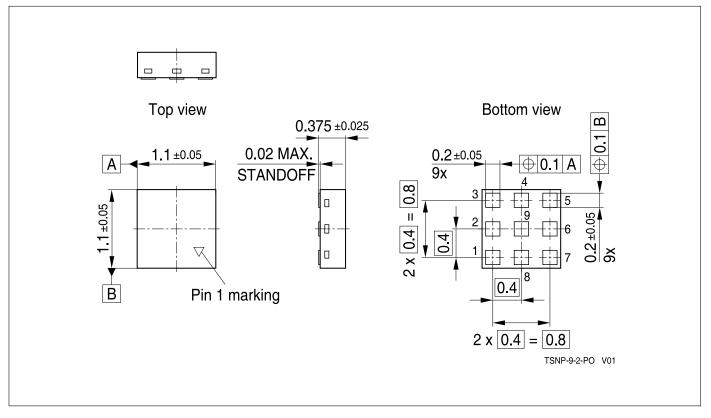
TSNP-9-2 Package Outline (top, side and bottom views)
